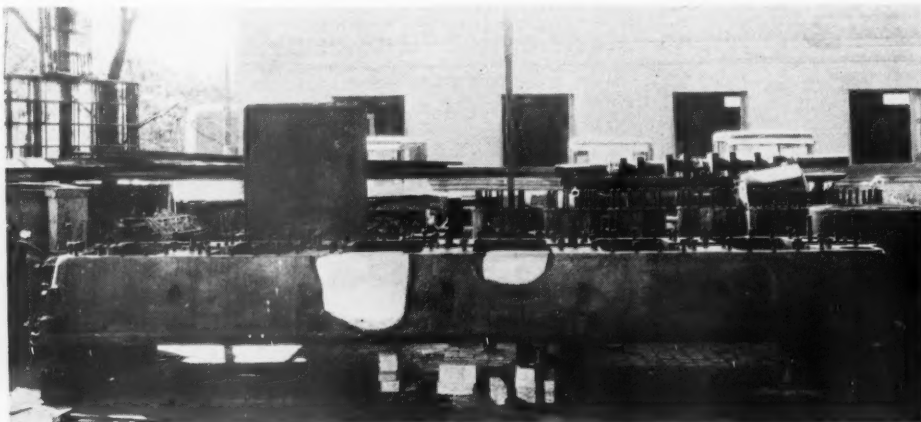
A counterweight breaking loose in a 360-hp. oil engine caused this repair job
